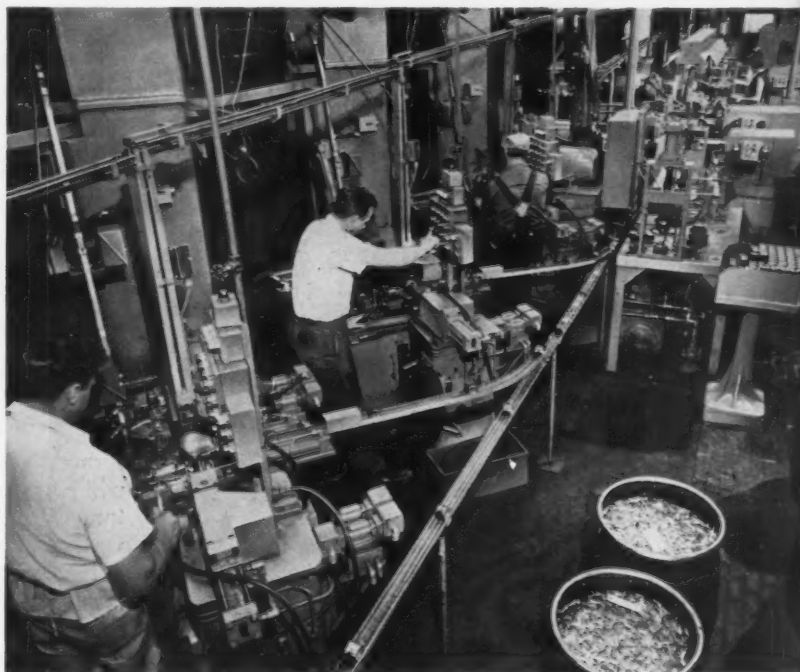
Riveting station on horn mounting bracket assembly machine (Fig. 6). Completed assembly is seen mounted on work-holding fixture at bottom.
